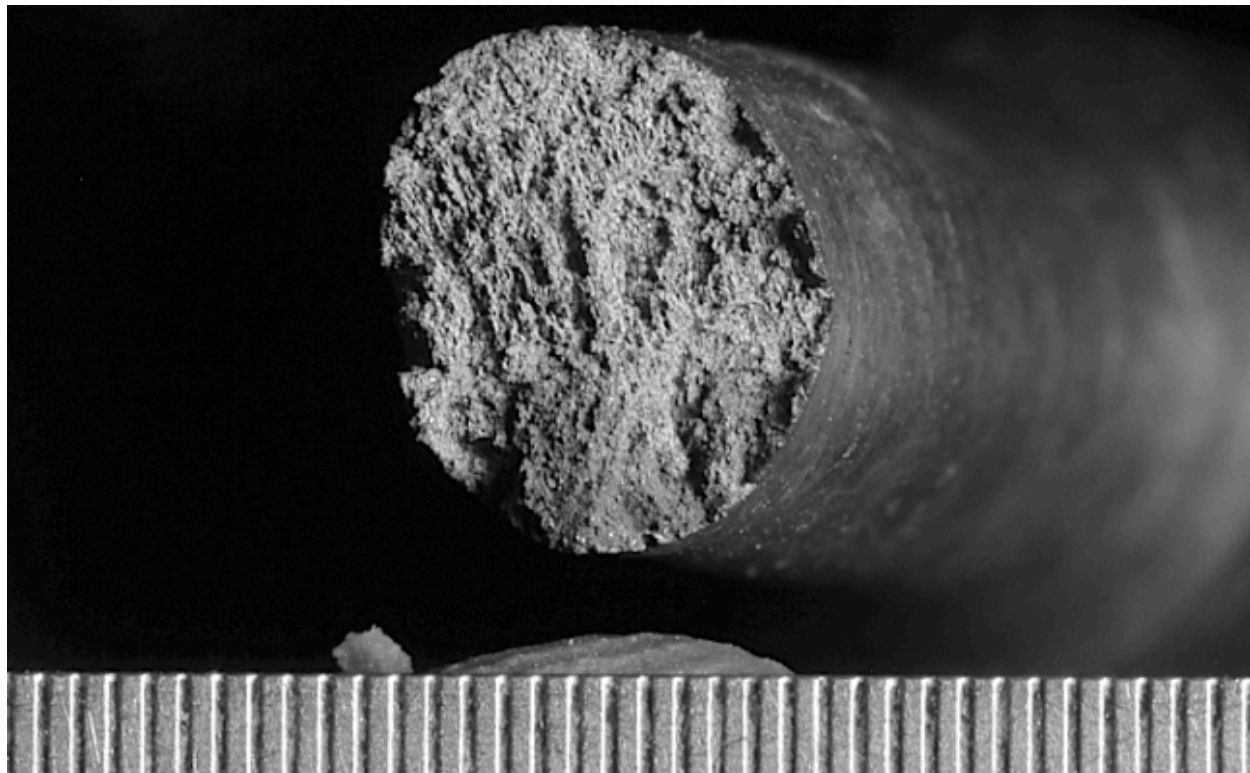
Macro-photographic image of the fracture surface of the specimen S7 halve demonstrated on the right-hand side in figure 42.
